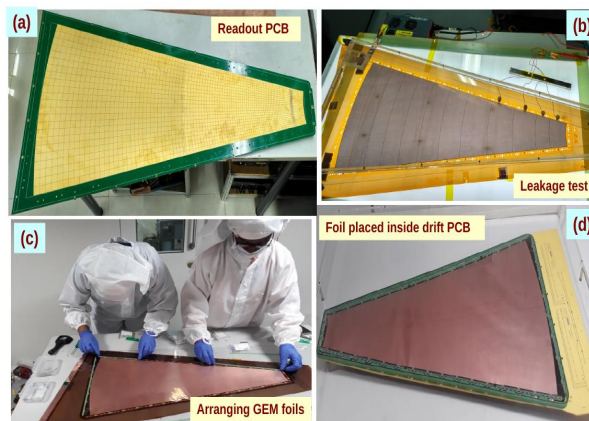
a) Picture of large size readout PCB. b) Picture of GEM foil and leakage test. c) Placing GEM foils with a gap of 2mm. d) Stack of GEM foils placed inside the drift PCB. Thanks to CPDA lab of VECC for providing a clean room.
